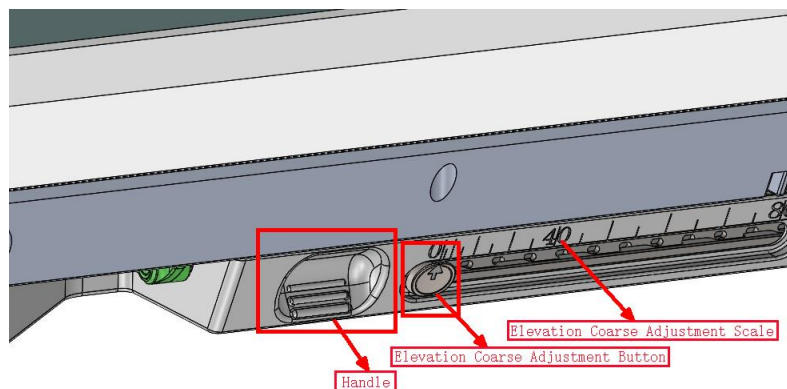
Handle, Elevation coarse adjustment button, Elevation coarse adjustment angle scale
